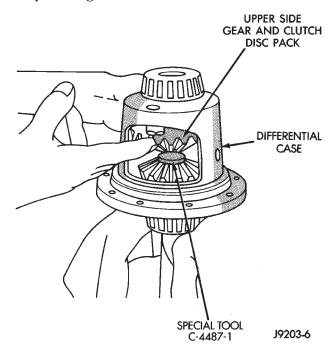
Upper Side Gear & Clutch Disc Pack Installation
